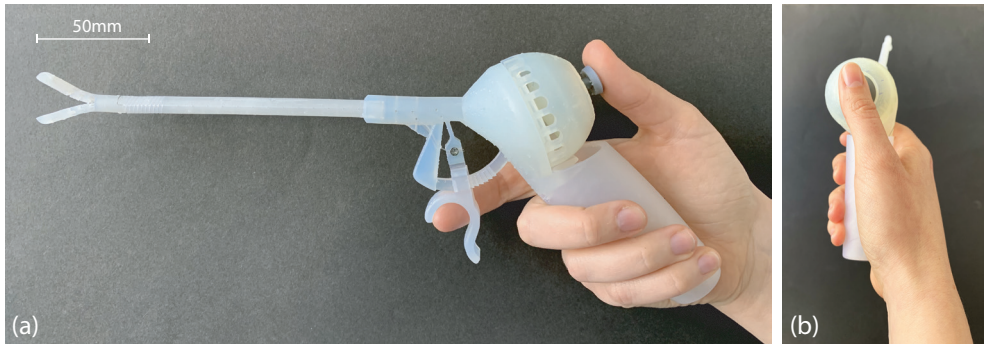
The assembled prototype. (a) Front view, (b) side view that shows the alignment of the wrist and the thumb.
